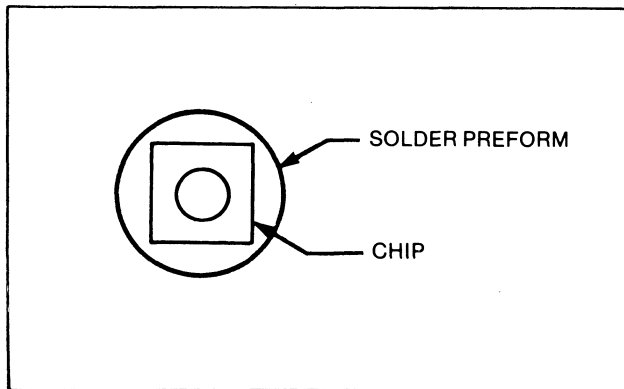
HOT GAS BONDING WITH SOLDER PREFORM
